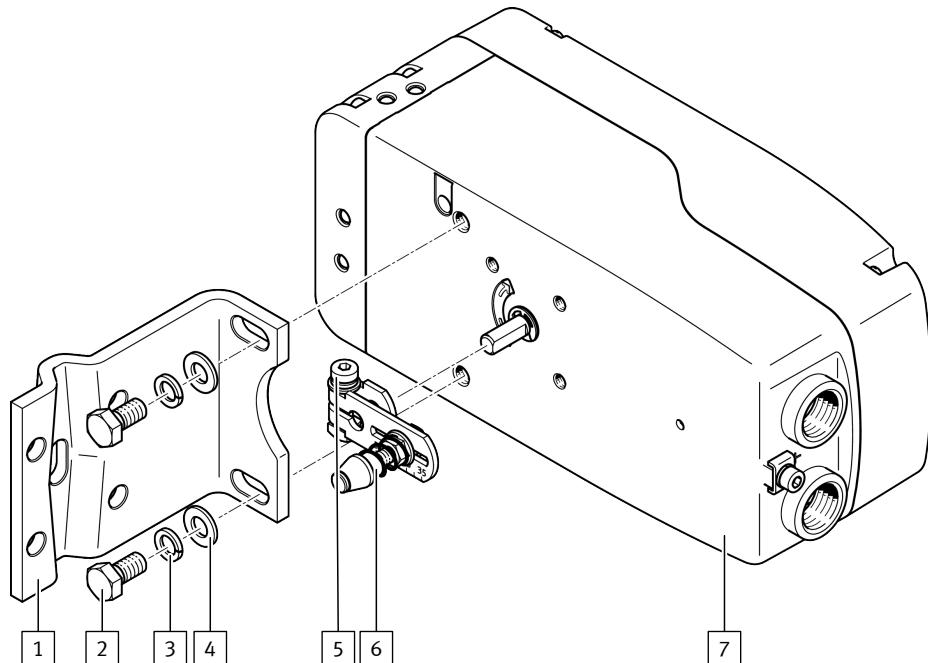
Mounting lever arm and mounting bracket on the CSMH-S-VDE1-....
